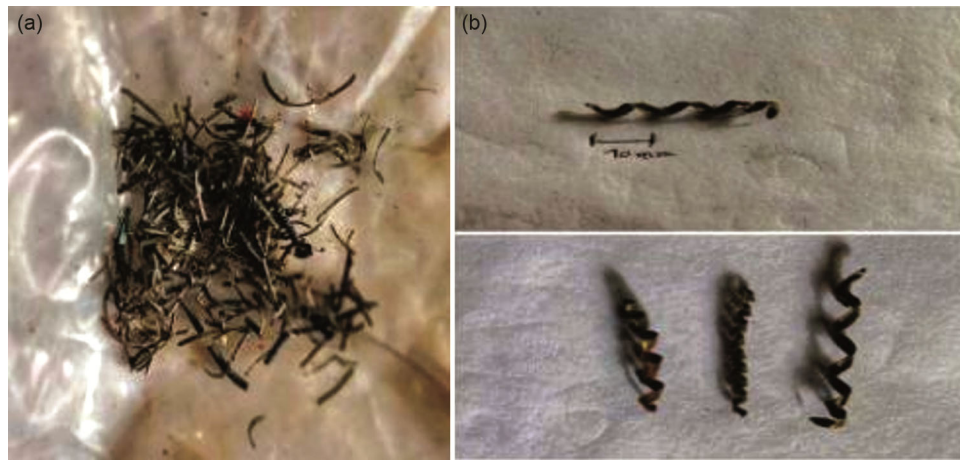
Mild Steel chips (a) straight and (b) spiral shape.
